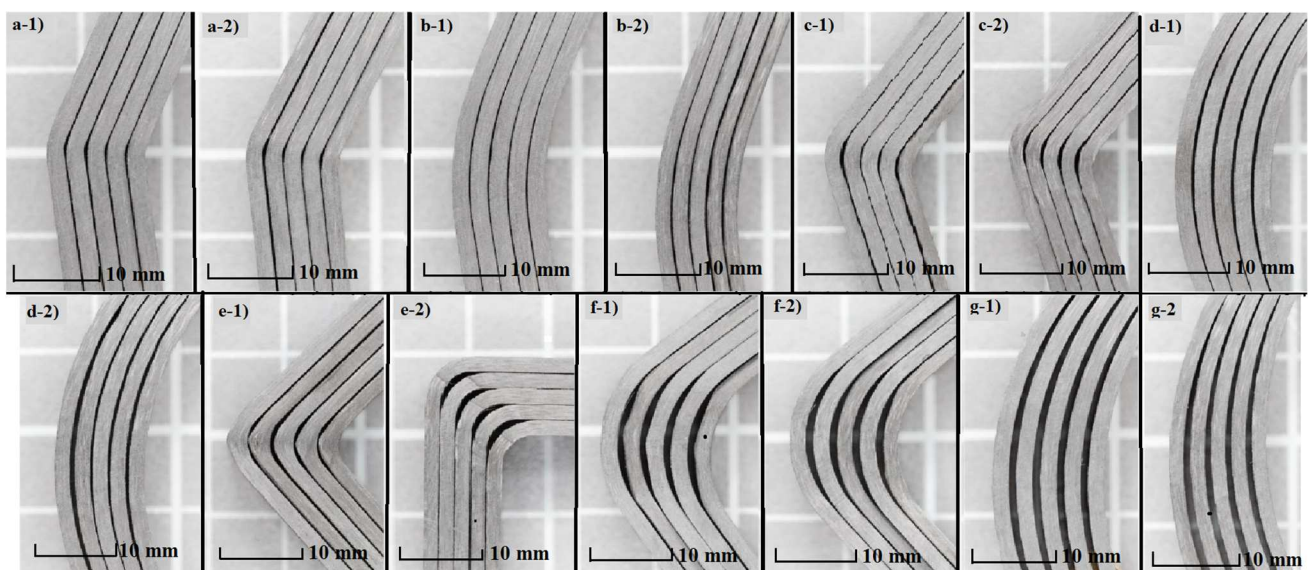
General overview of manufactured curved beam specimens: 1) thin ply specimens; 2) standard ply specimens; a) 150° angle and 4 mm inner radius; b) 150° angle and 36 mm inner radius; c) 120° angle and 4 mm inner radius; d) 120° angle and 36 mm inner radius; e) 90° angle and 4 mm inner radius; f) 90° angle and 12 mm inner radius; g) 90° angle and 36 mm inner radius
